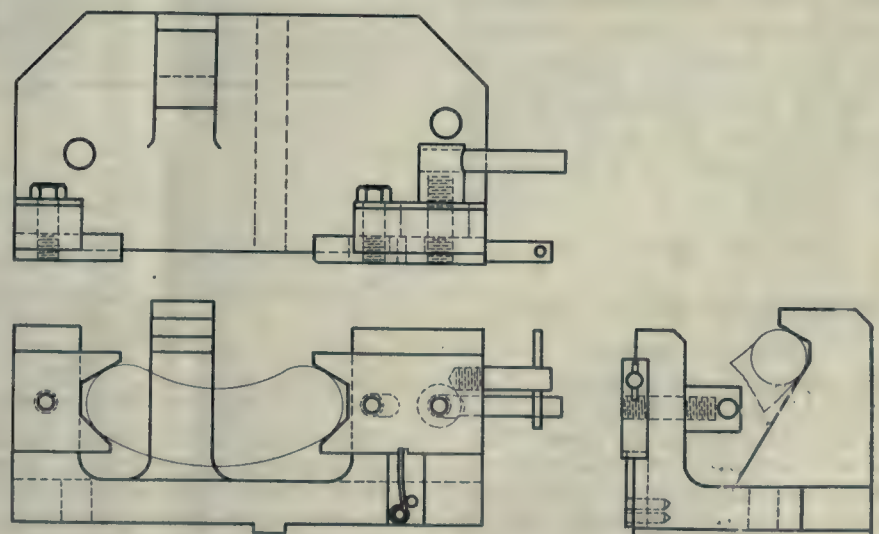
FIXTURE FOR DISC GRINDING LEVER SUPPORT.
